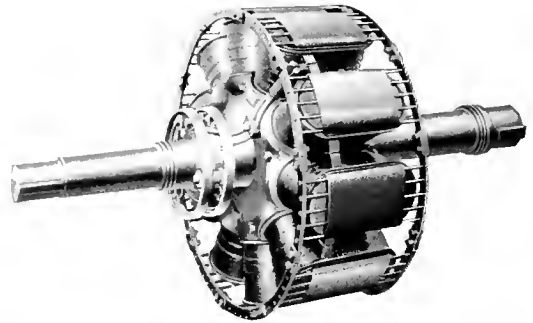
Completely Assembled Field of a Synchronous Motor. The copper bars comprising the pole-face winding are tightly riveted to the sectionalized end rings
